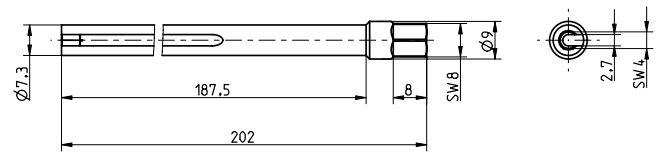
Mounting wrench ø7,3 mm, slotted, Type 1300B14Q01
